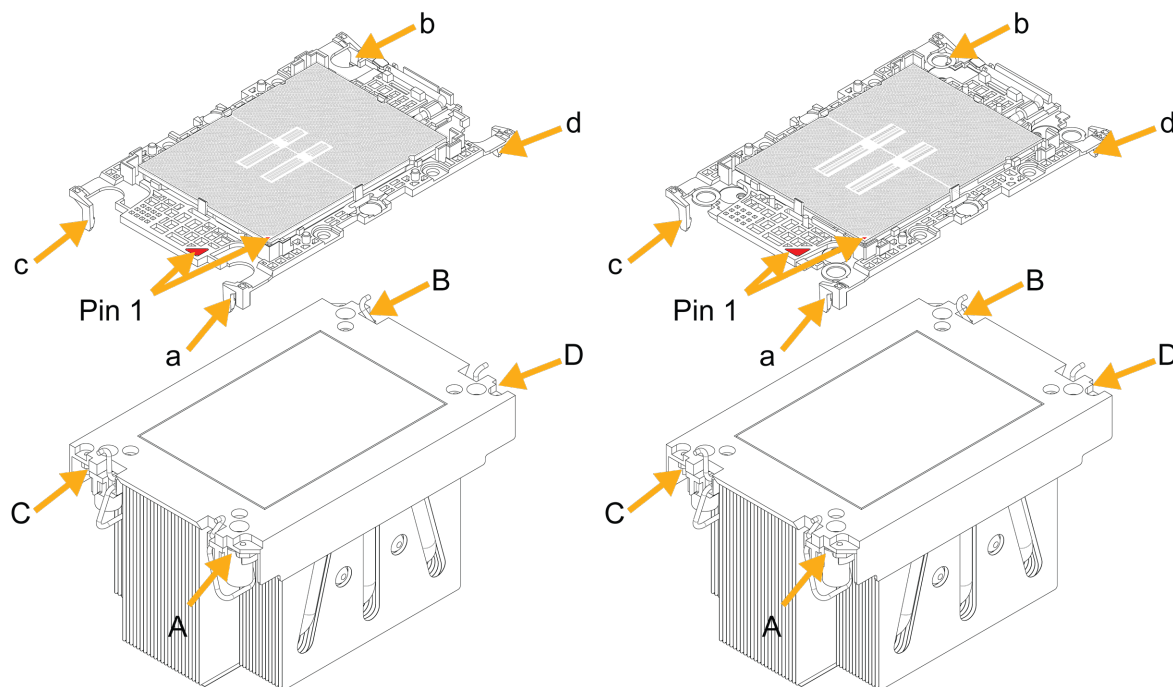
Carrier Assembly Completed (SP XCC E2A left, SP HCC/LCC E2B right)
